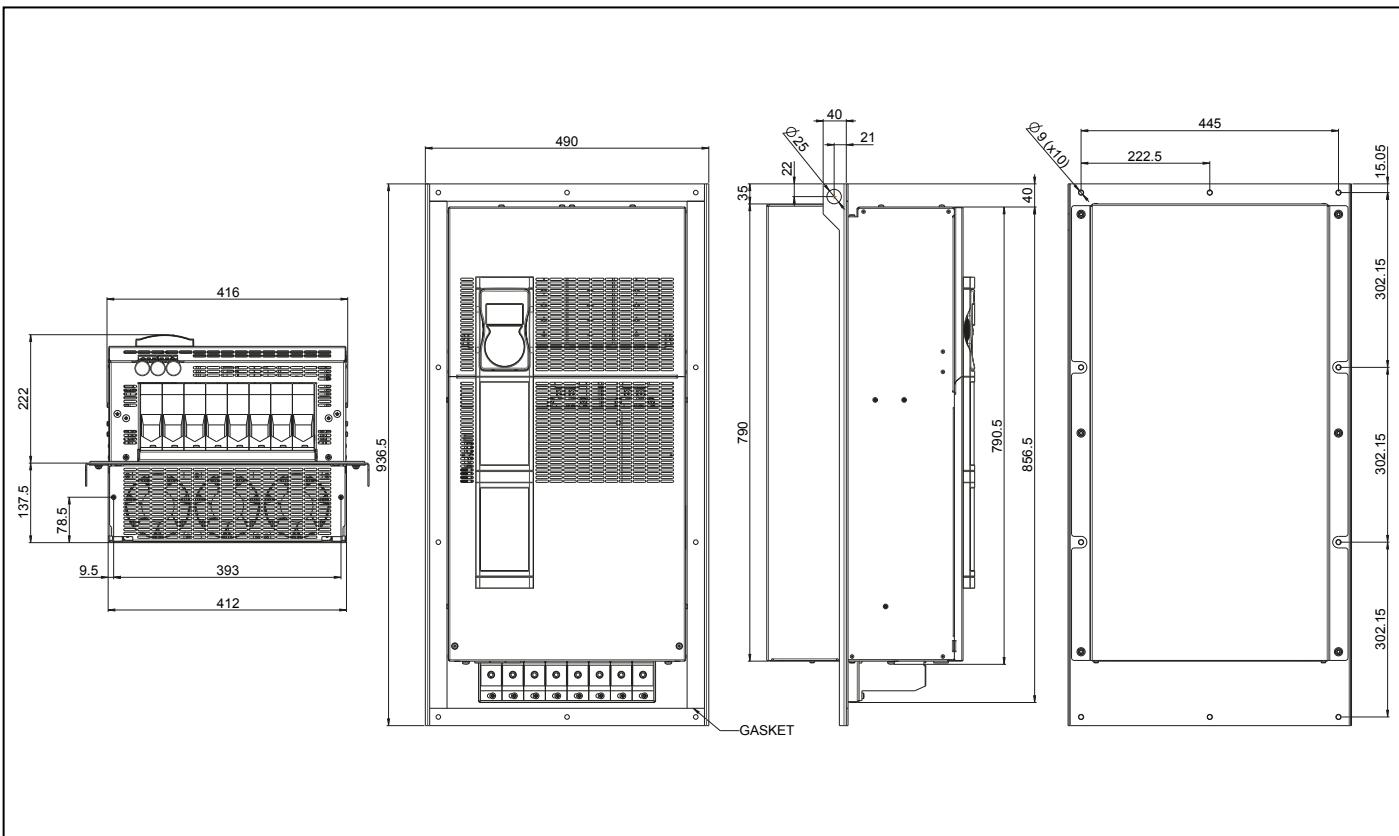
Size 6 ADV200 SP-EH... dimensions
